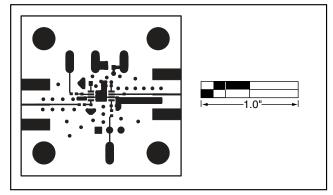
MAX2754 EV Kit PC Board Layout—Component Side
